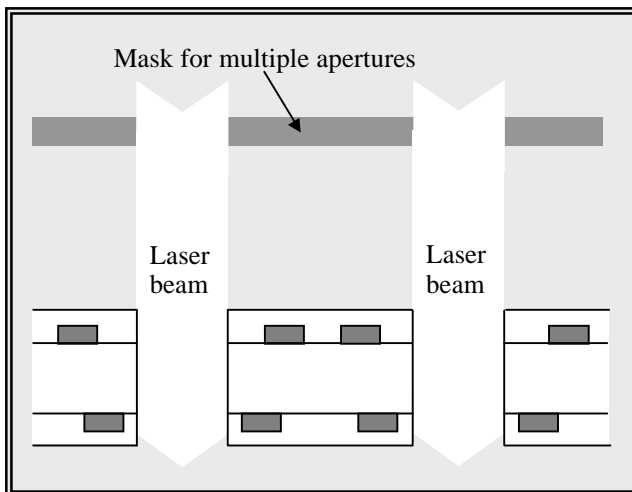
Cross-section of FPC during laser manufacturing of apertures, using a separate mask only to confine the beam.
